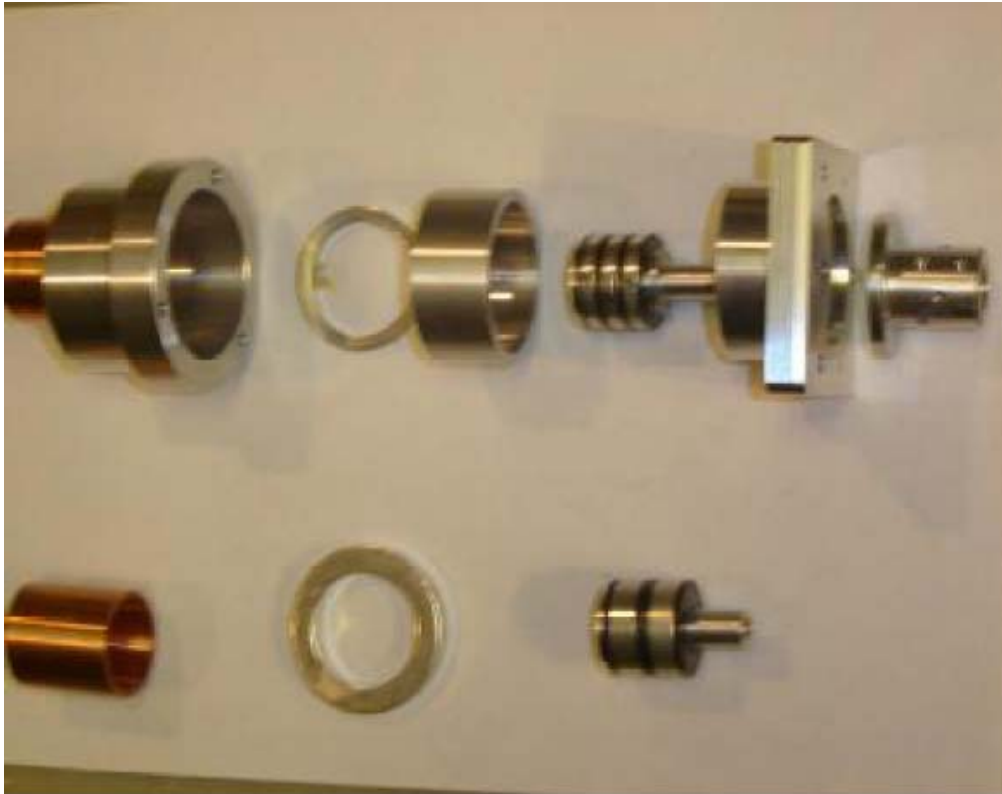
Bearing parts. Above magnets and rings for a 3-row bearing. Below larger magnets for a 2-row bearing.
